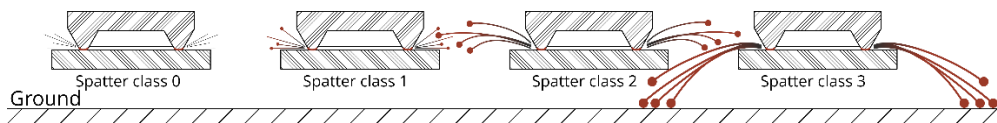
Classification of welding spatters in capacitor discharge welding [9]
